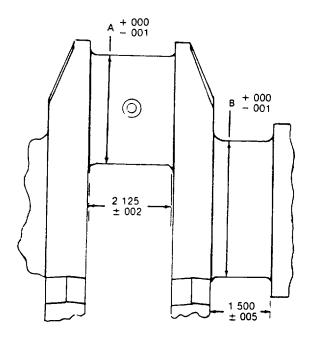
Measuring of Main and Connecting Rod Bearing Journals.
